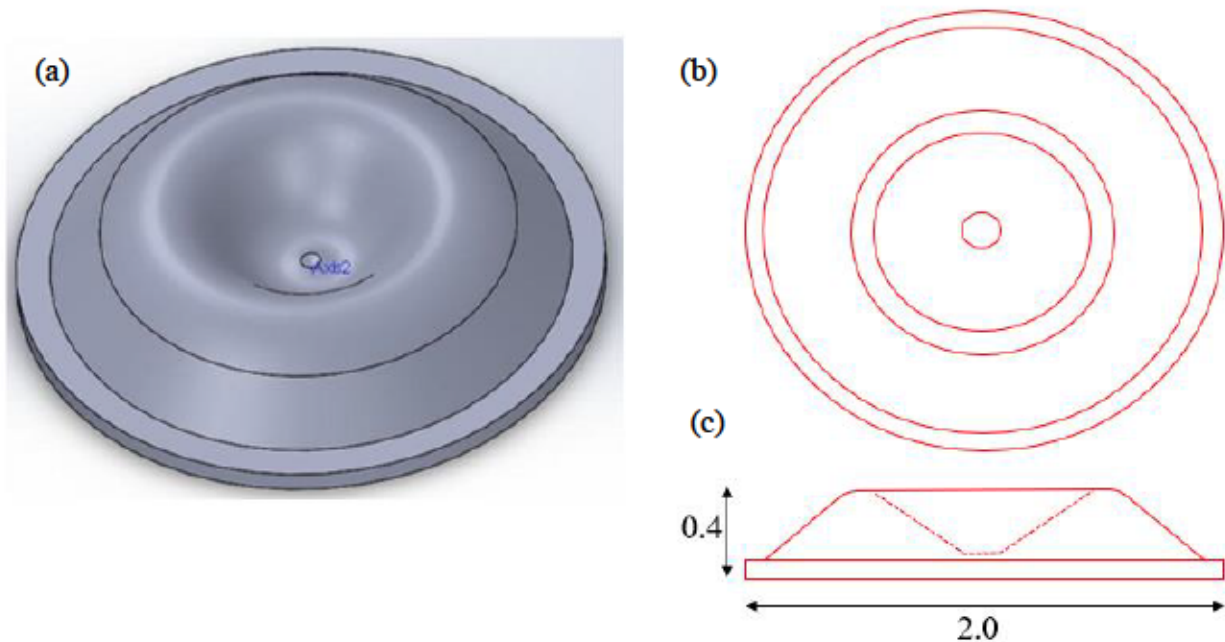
(a) Target design created in SOLIDWORKS; (b) Top view of target; (c) Cross-sectional view. The dimensions are in inches.
